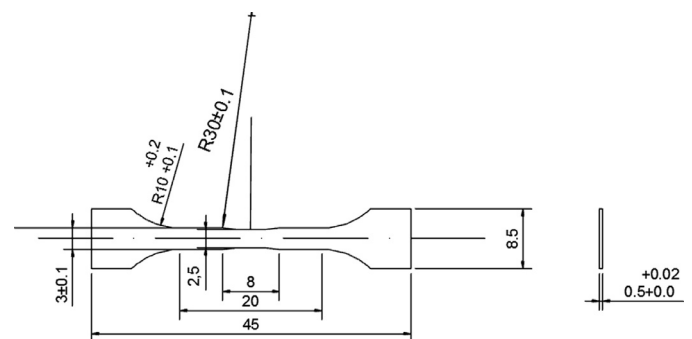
Geometry of fatigue specimen (all dimensions in mm).
